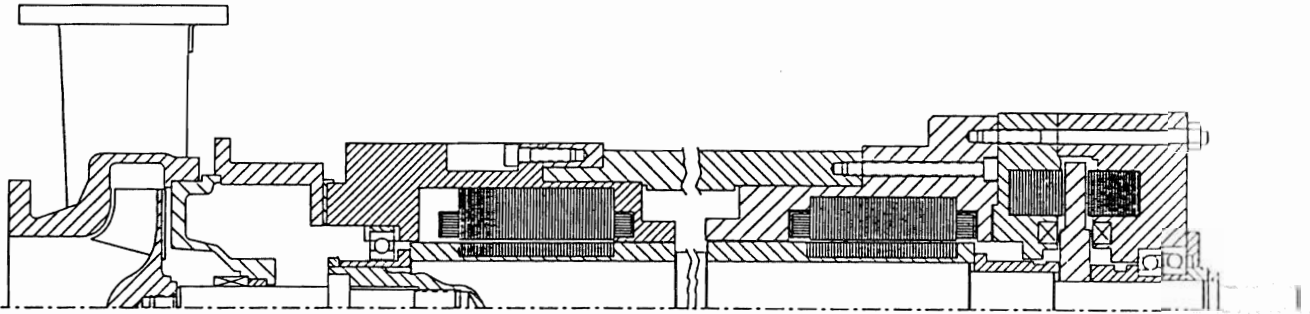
Schematic of the Magnetic Bearing Test Rig at Ingersoll-Dresser Pumps. Note the locations of the two Radial and single double-acting axial magnetic bearings.
